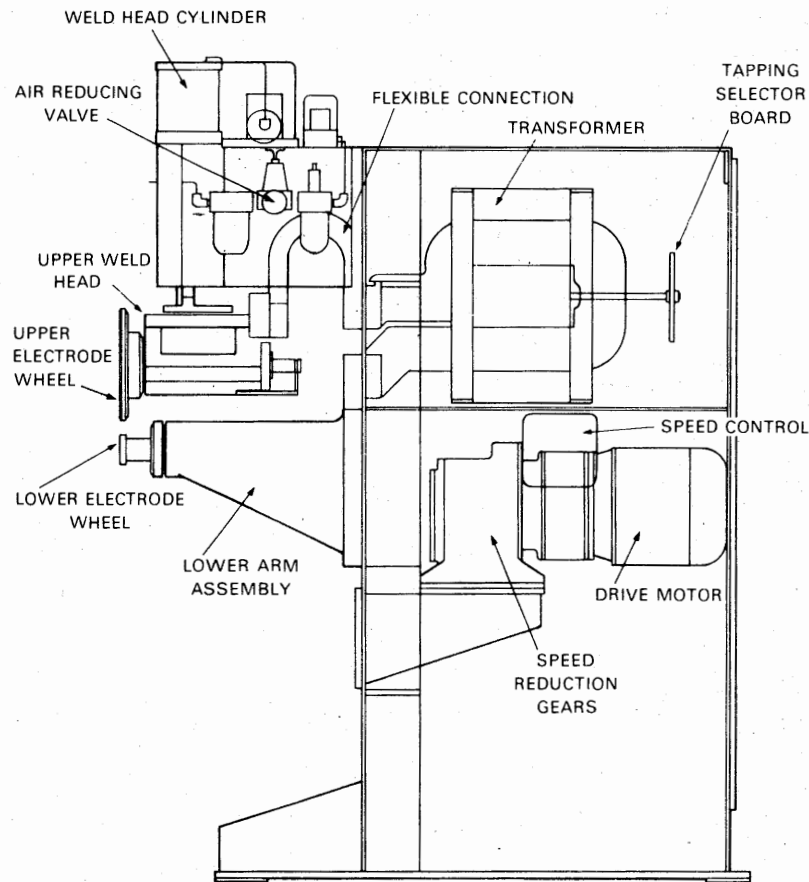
CIRCUMFERENTIAL SEAM WELDER
